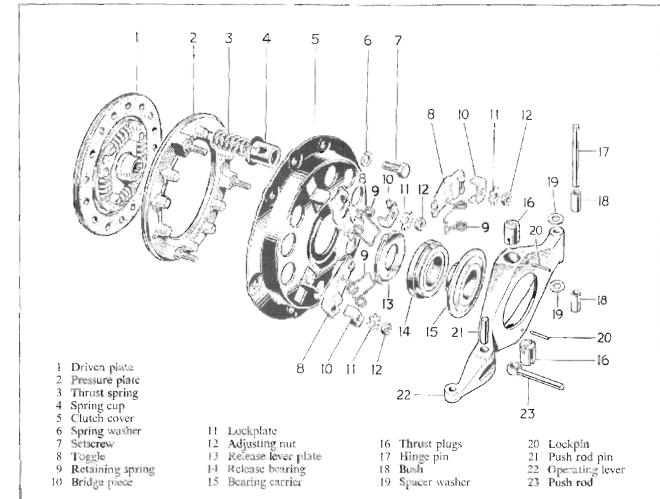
Exploded clutch unit (Herald 1200, 12:50 and Spitfire)
